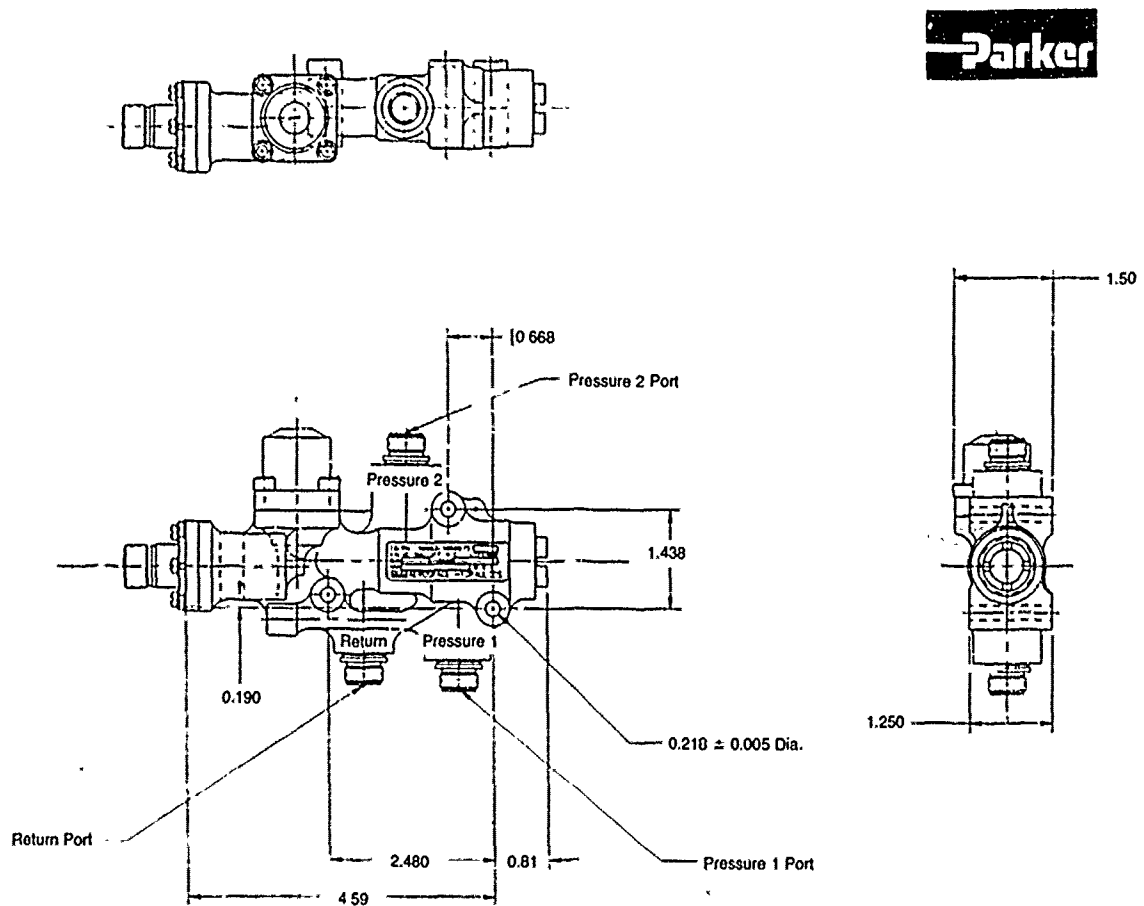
Parker - Selector Valve (3W-2P) Outline Drawing
